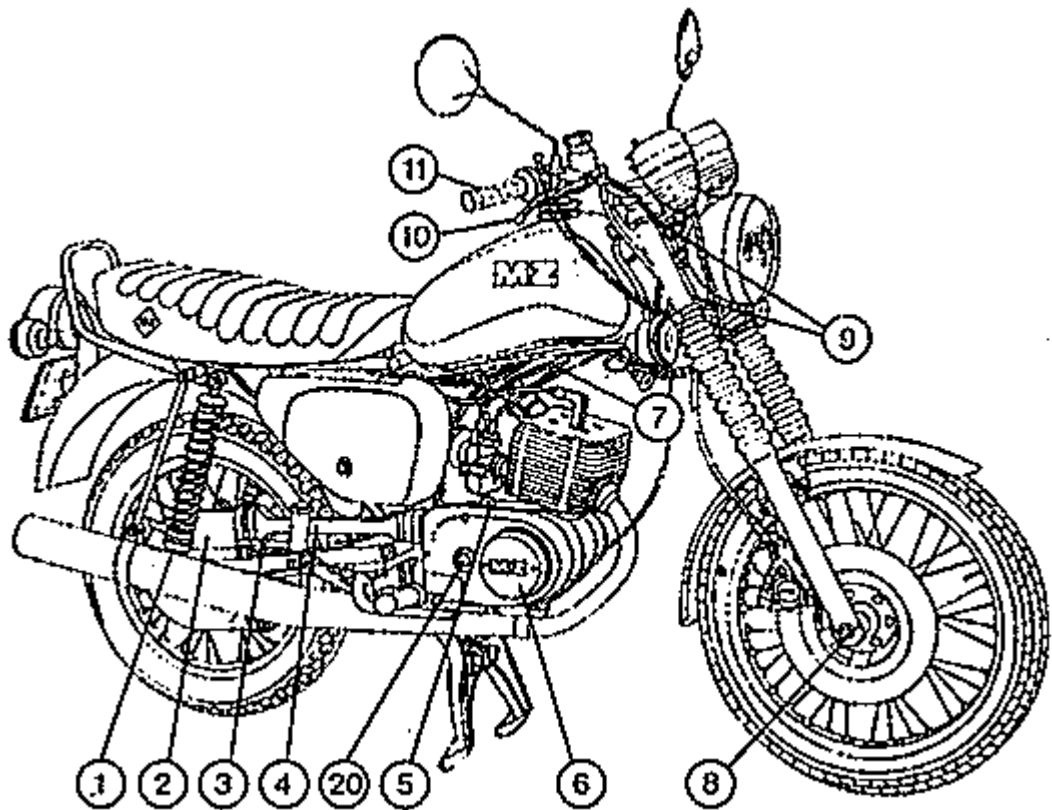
ETZ 125/150 - View from the right (For explanation of the legends see Section [4.3.](#))
